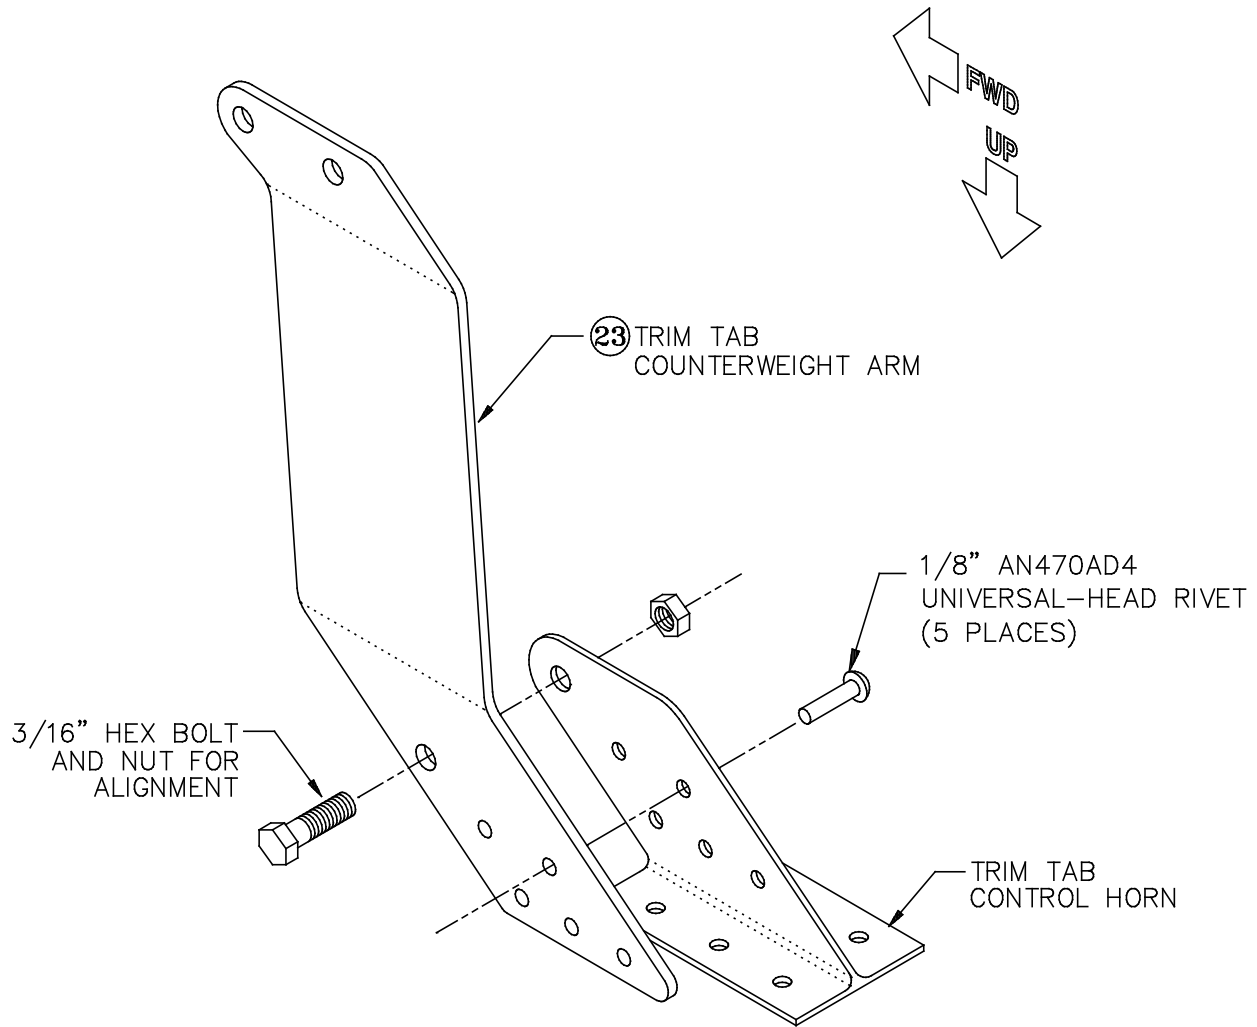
Riveting the Counterweight Arm to the Trim Horn
